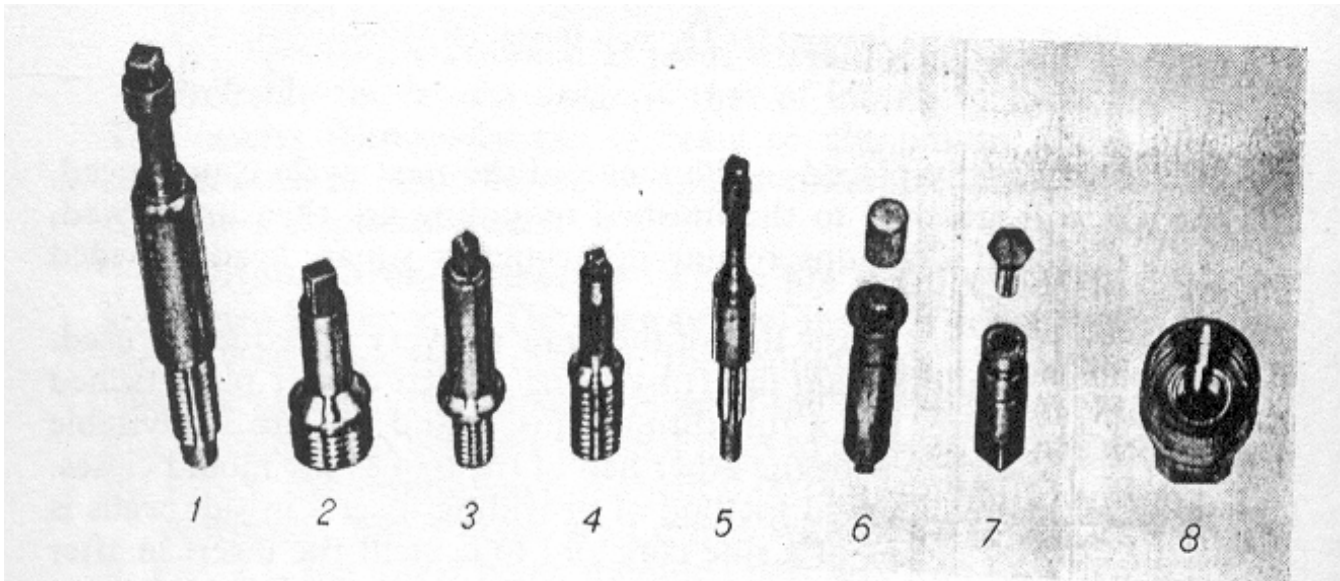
Carrier Pins for Inserts and Moulded Thread Pins: 1. Pin to produce Male Moulded Thread and Boss, with Parallel Seating; 2. Carrier for Male Insert with Circlip Location and Parallel Seating (Only the Bottom of the Thread Carrier Hole is threaded to minimize Time in screwing Insert in and out); 3. Carrier for Blind-threaded Female Insert with Circlip Location and Valve Seating (Note the Short Length of Screw Engagement to minimize Time in screwing Insert on and off); 4. Valve-seated Threaded Pin to produce Female Moulded Threads and Two Parallel Bores, with Spring-wire Location (Note the Turned-down Portion on Locating Length to provide Relief on this Length); 5. Valve-seated Threaded Pin to produce Female Moulded Thread, with Spring-wire Location; 6. Valve-seated Threaded Pin to Produce Female Moulded Thread, without Spring Location; 7. Carrier for Full Through-threaded Female Insert, with Valve Seating; 8. Threaded Pin with Valve Seat and Spring-wire Location to produce Female Moulded Threads and Two Parallel Bores (Note the Turned-down Portion on the Locating Length to provide Relief).
